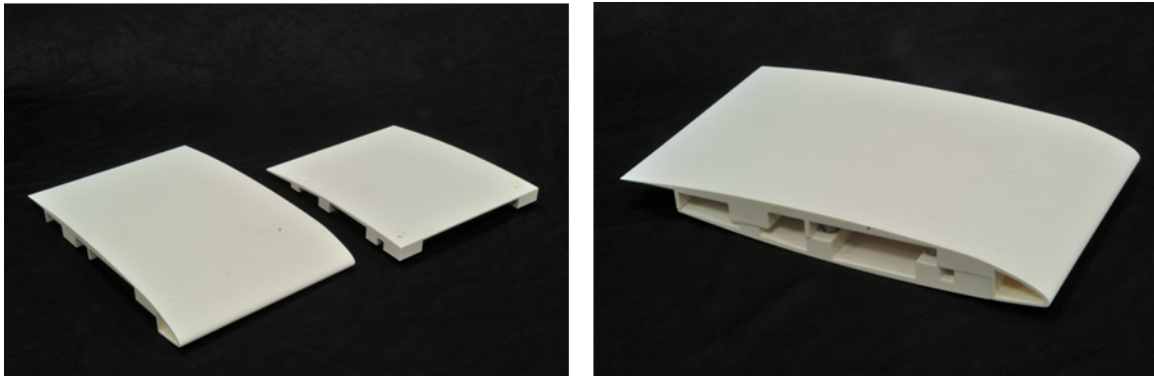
3-D printed airfoil section of the SMA SCF wing prototype
